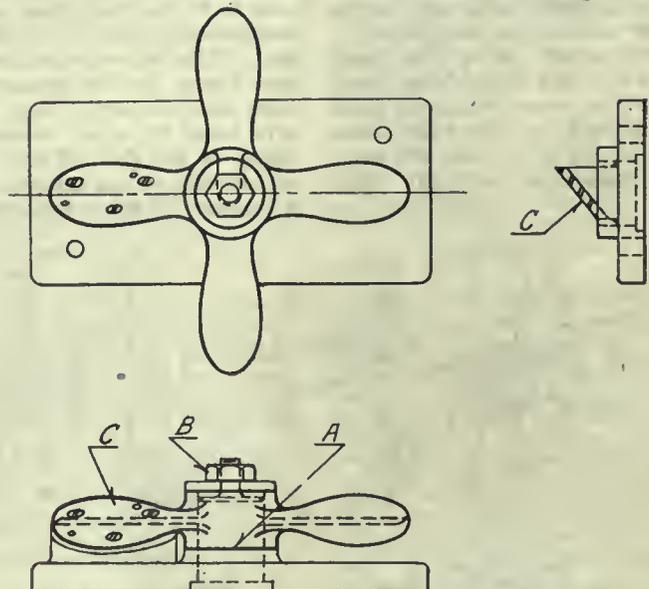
FIXTURE FOR PROPELLOR BLADE.
